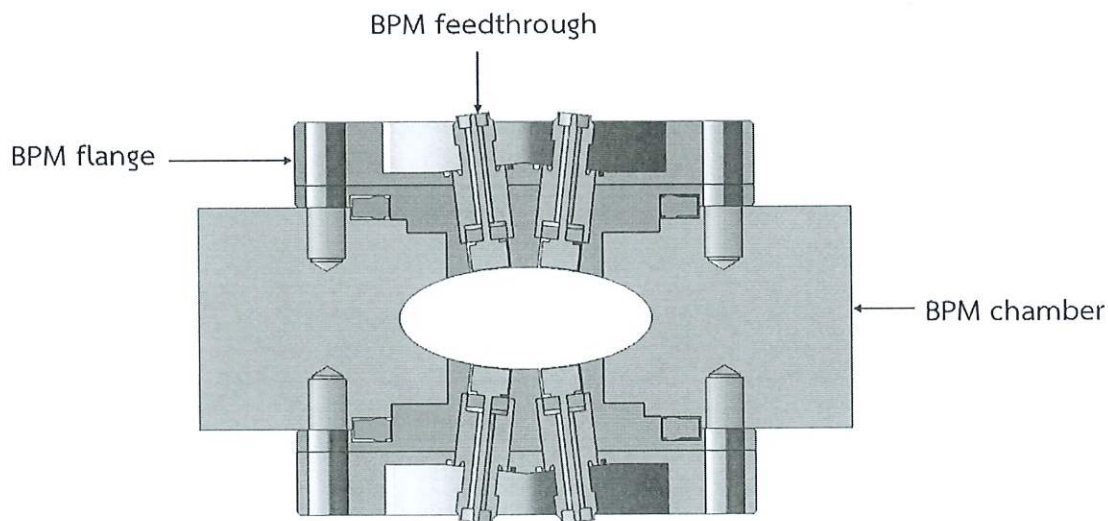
Cross section of the BPM flange installed to elliptical vacuum chamber
